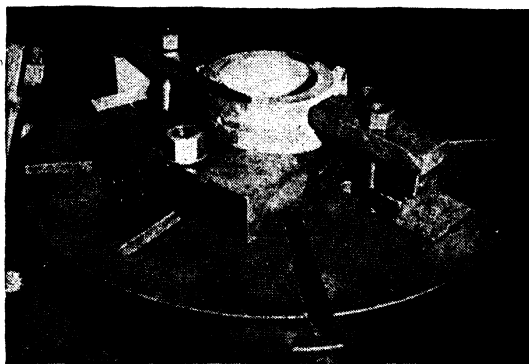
Homemade wedge block bolts to conventional lathe faceplate.
